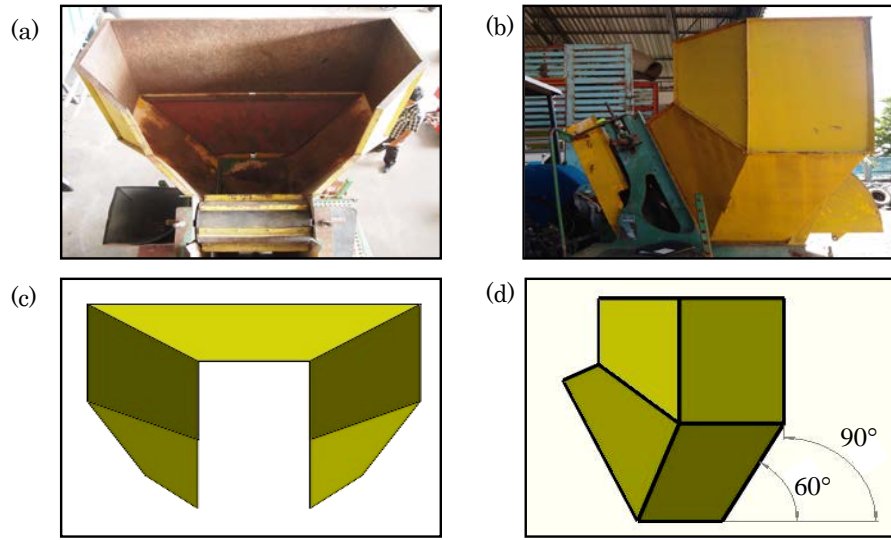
The original container bin: photo top view (a), photo side view (b), drawing top view (c) and drawing side view (d)
